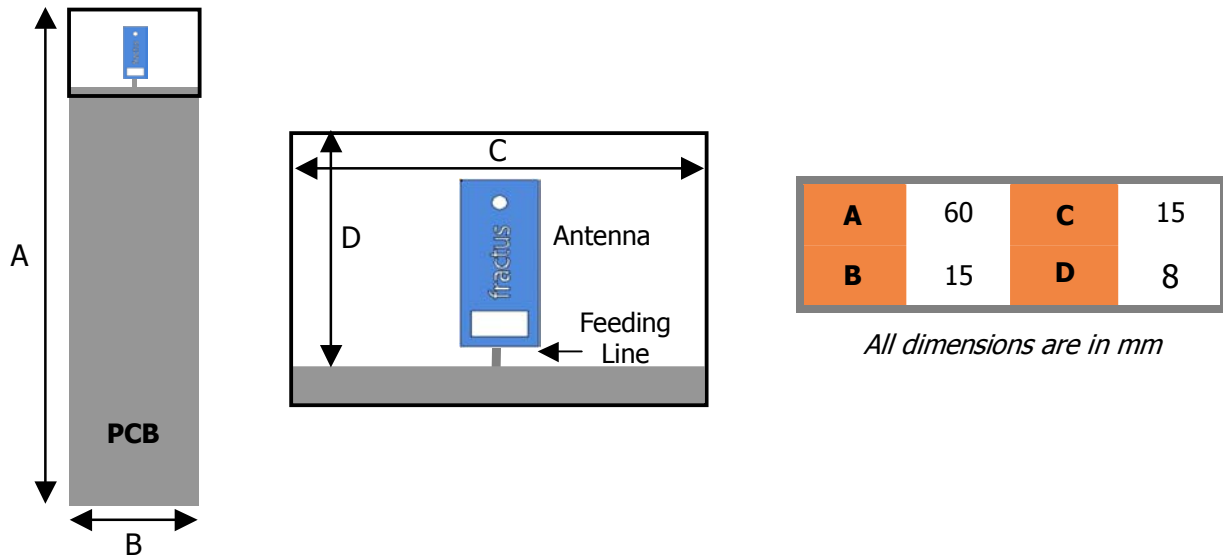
PCB Dimensions and Clearance Dimensions.
